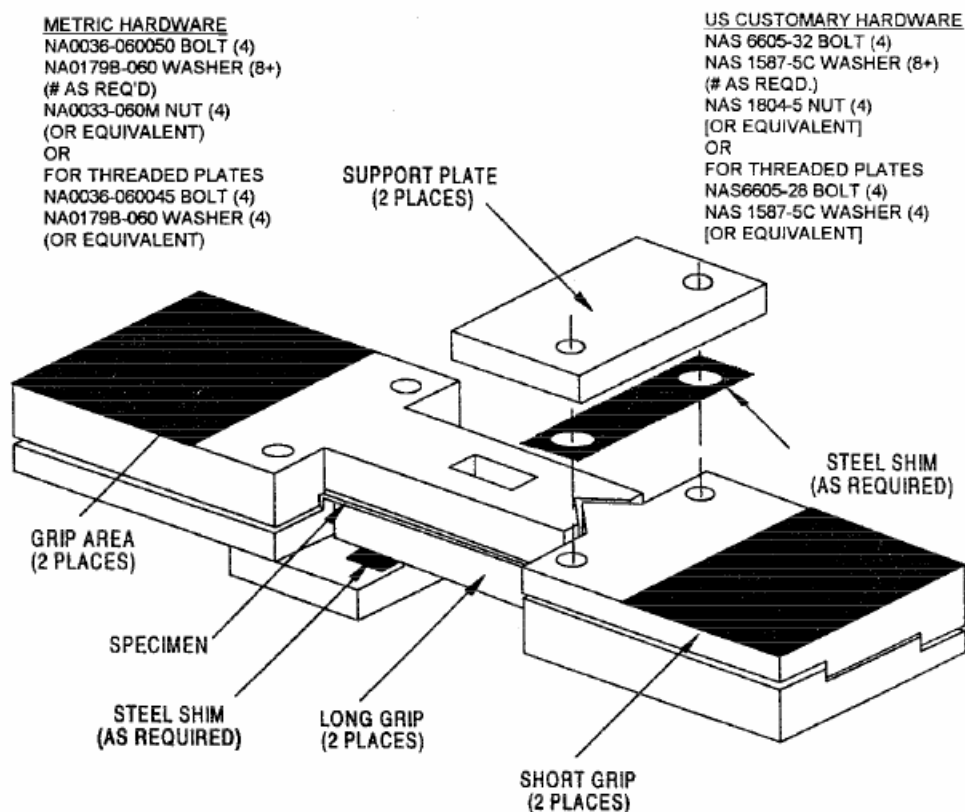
Support Fixture for Compression Tests (ASTM D 6484)
